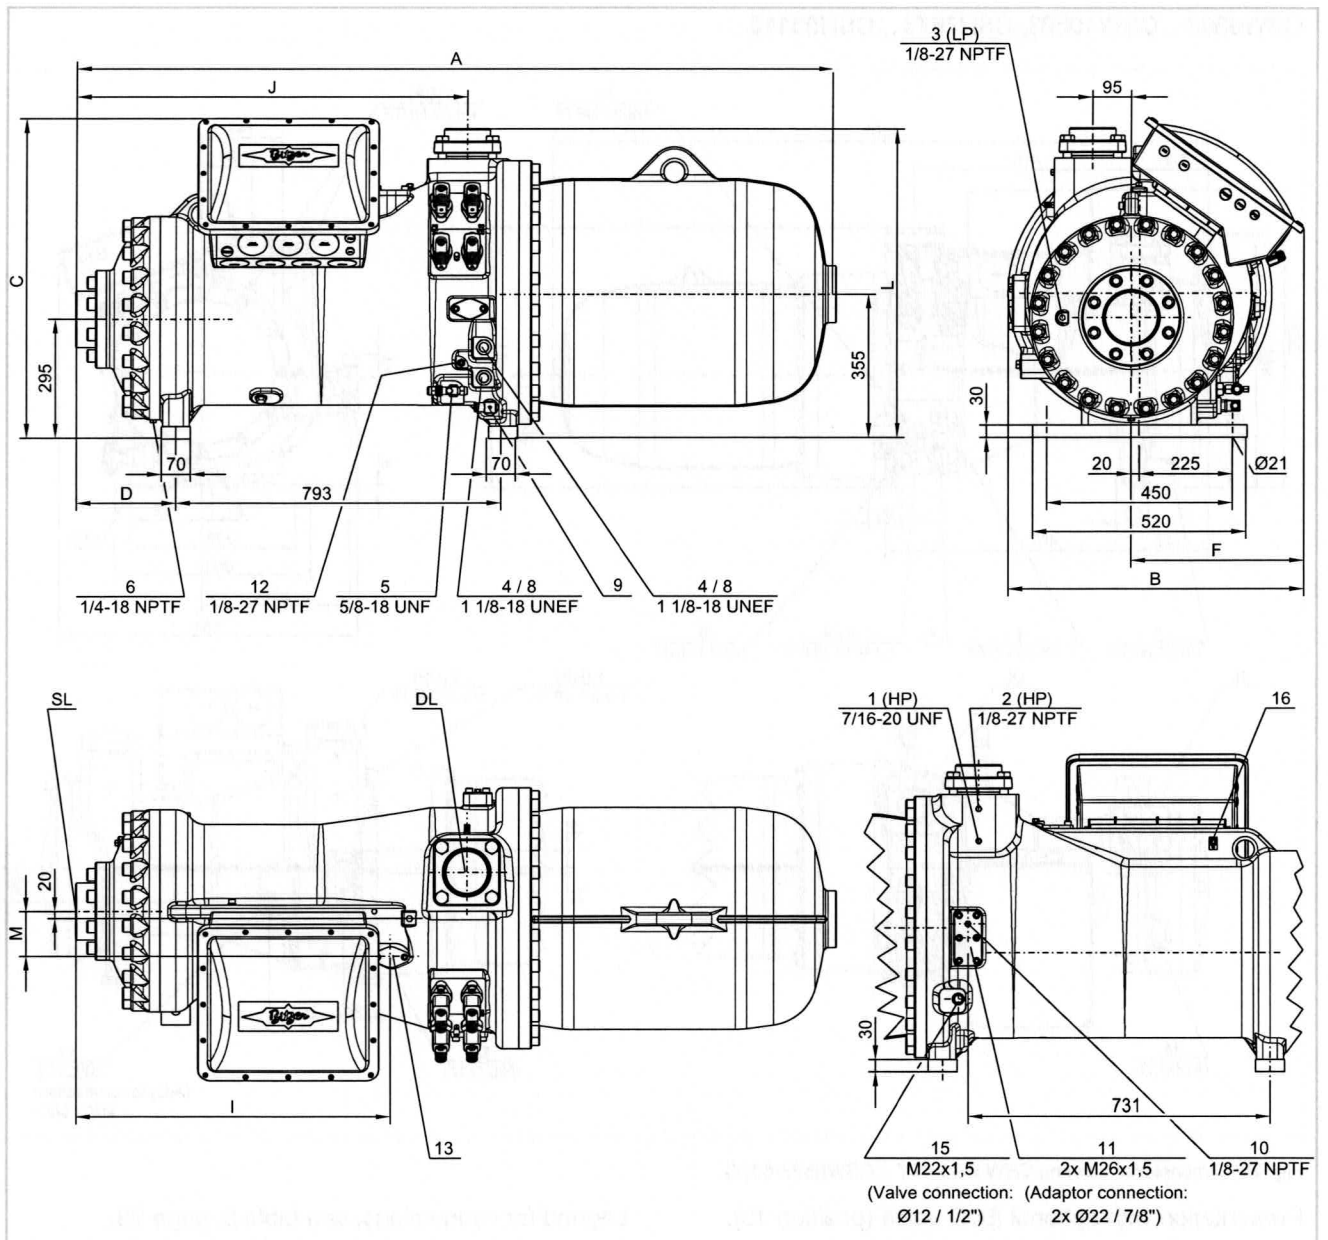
Dimensional drawing CSH9553-180(Y) .. CSH95113-320Y
